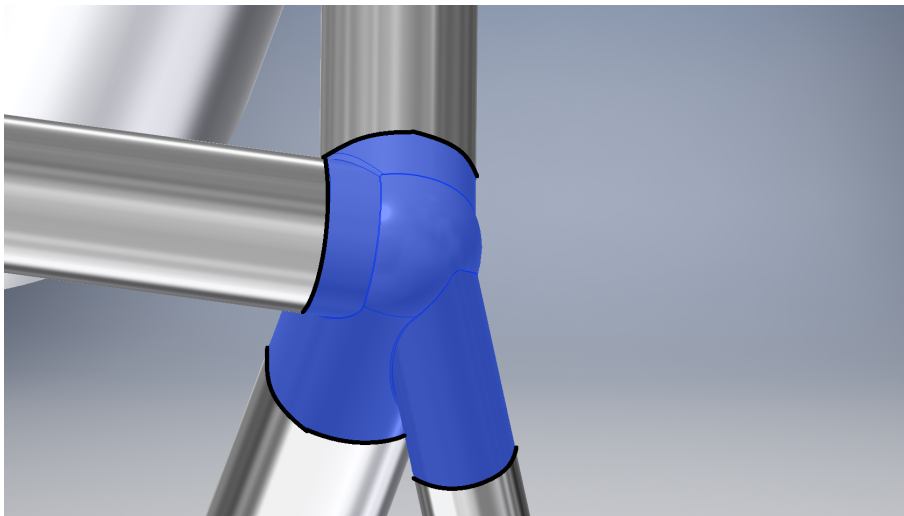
Weldments on insert, dark lines are weldments and the insert is colored blue for better vision.
